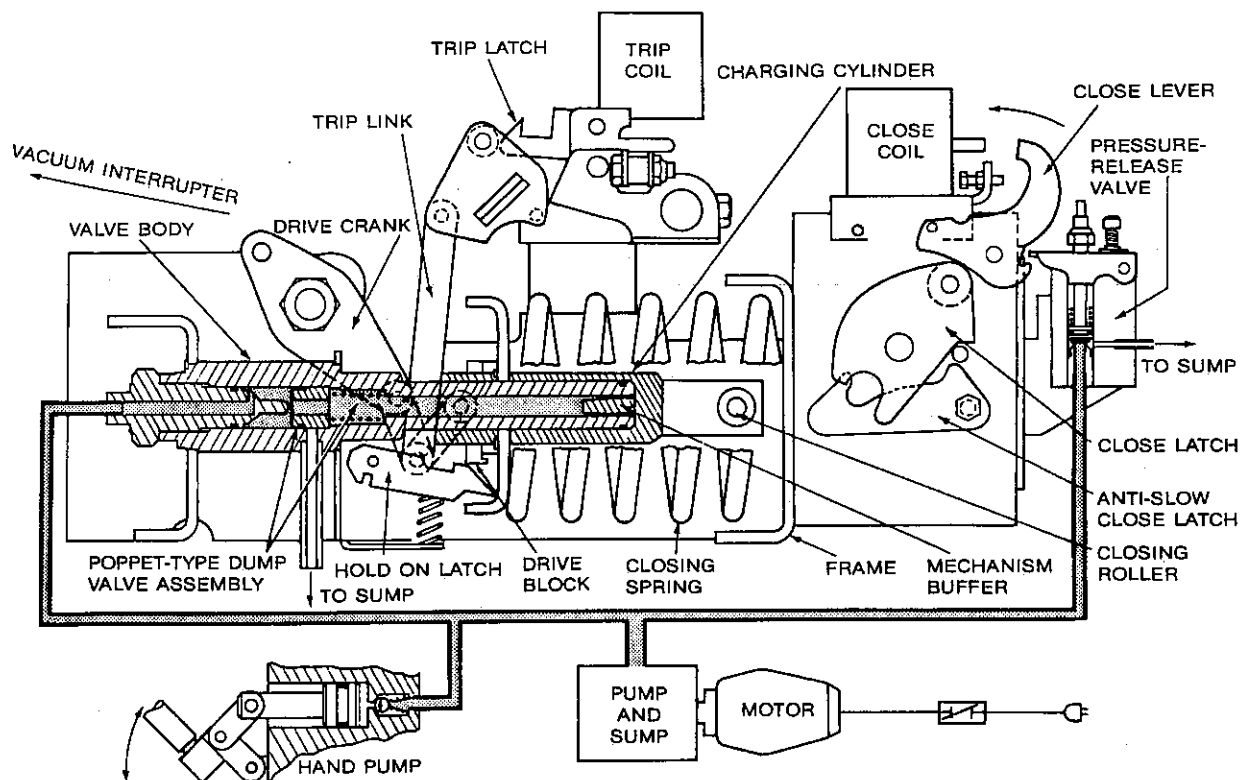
Breaker open, closing spring charging, hydraulic system operating.
